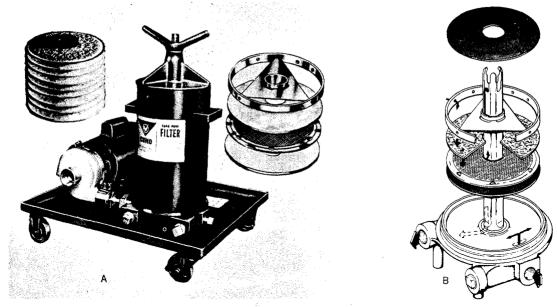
Disc filter casing (A) accommodates precompressed cartridges or disc media. Exploded view (B) shows liquid flow through assembled disc. (Courtesy of the Cuno Engineering Corporation.)
